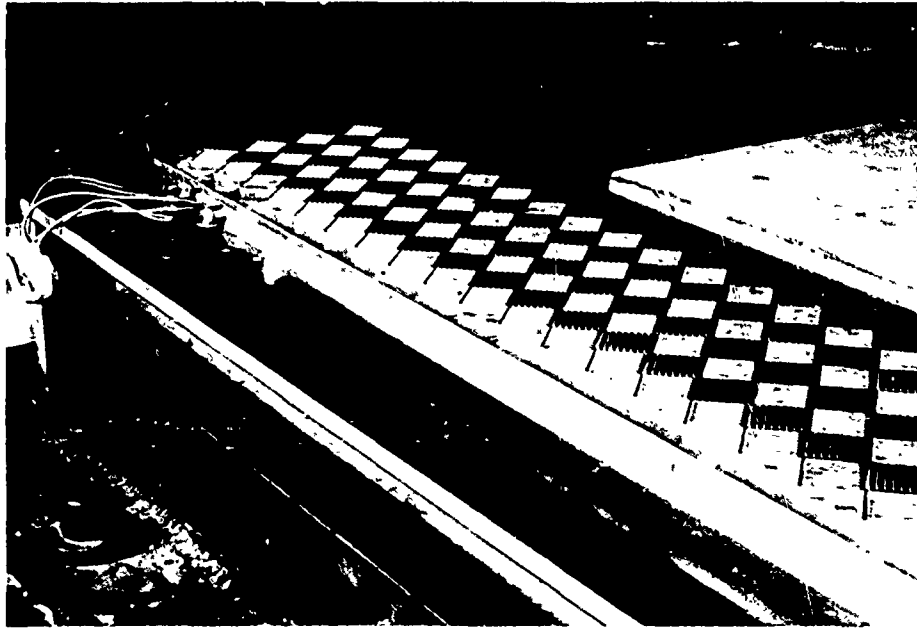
Cushion Forming Die Closeup (Photo 4R11803)
